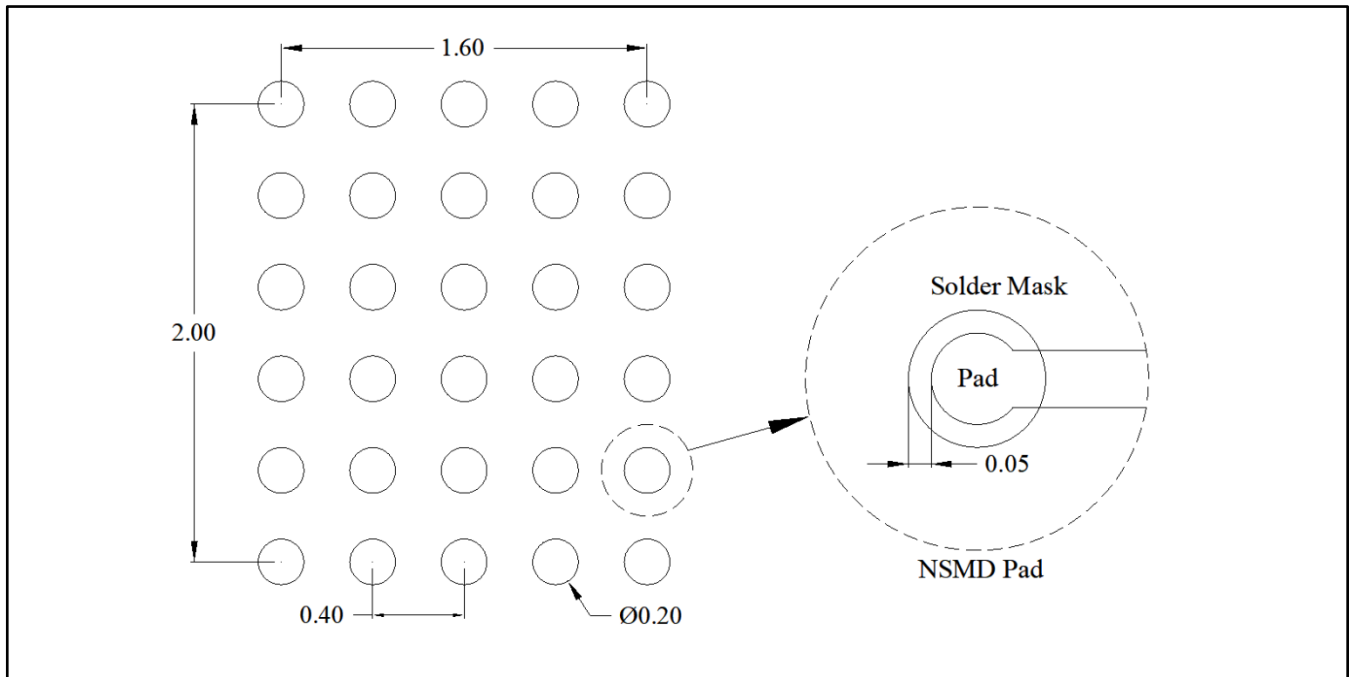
WLCSP 30B 2.1mm × 2.5mm soldering footprint (NOT TO SCALE)
